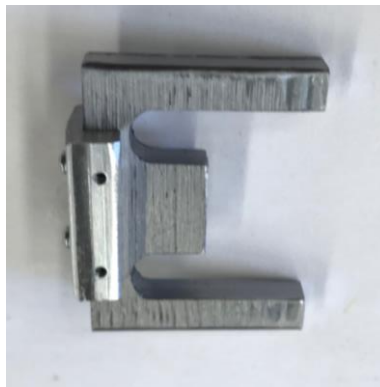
HALF OF STATOR WITH C-BLOCK
